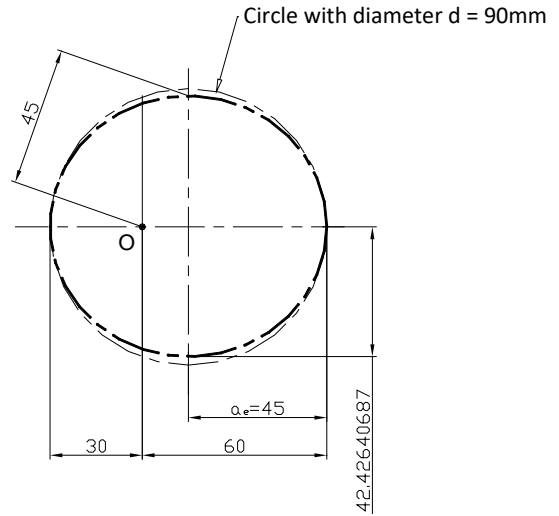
Dimensions of the designed pitch ellipse of the non-circular gear wheel
